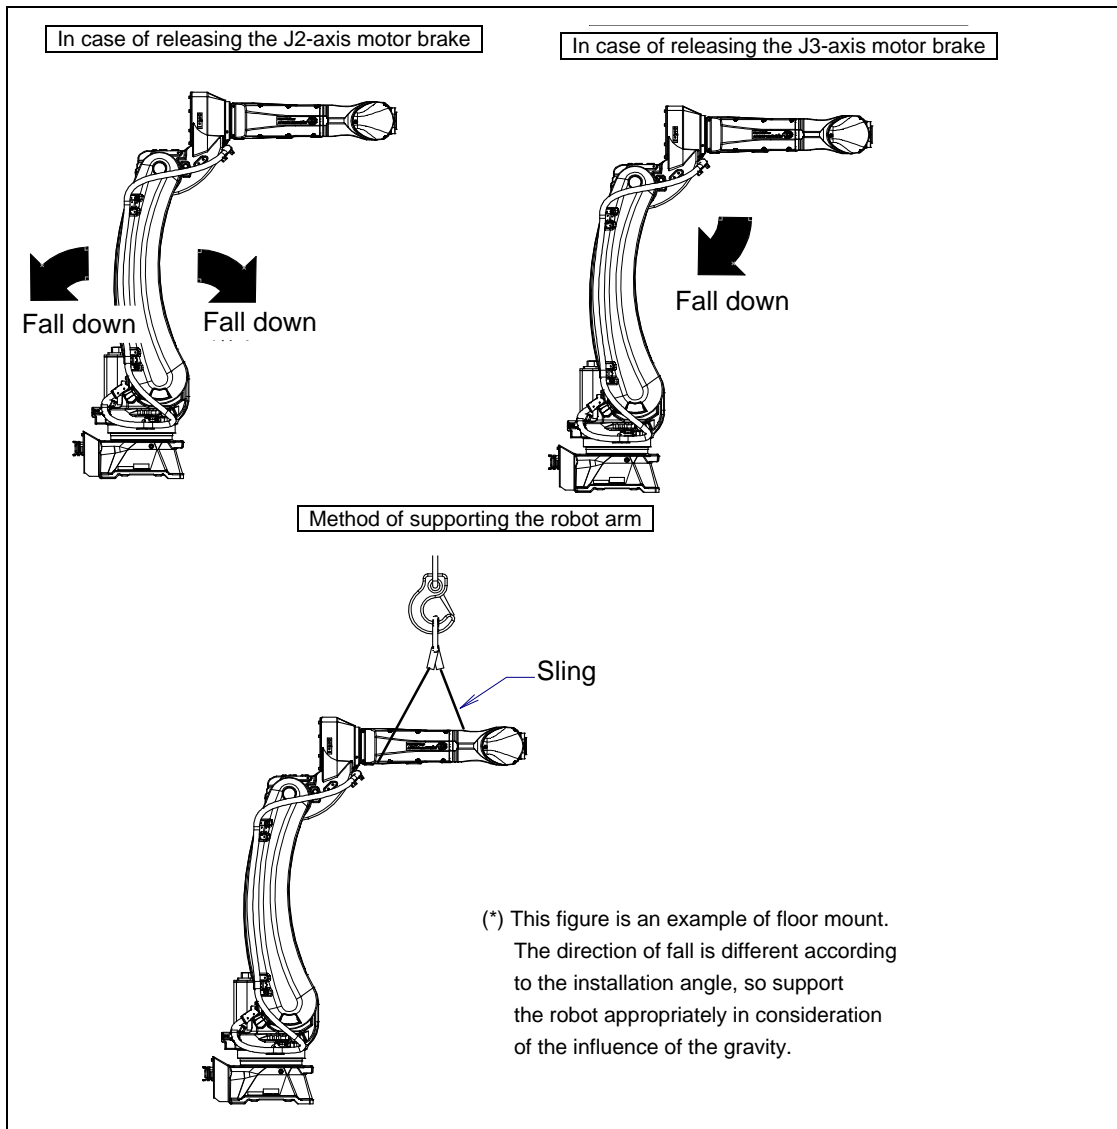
(a) Releasing J2 and J3 motor brake and measures
